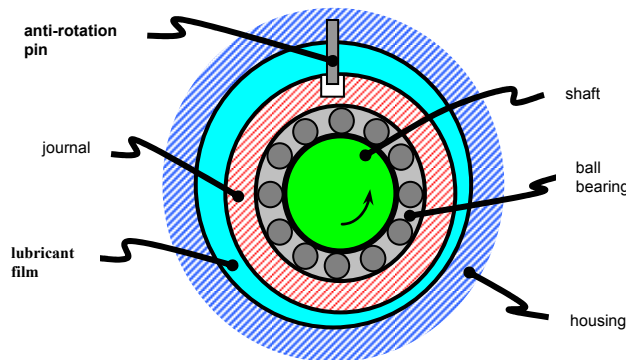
Schematic Views of Typical Cylindrical Journal Bearings.
